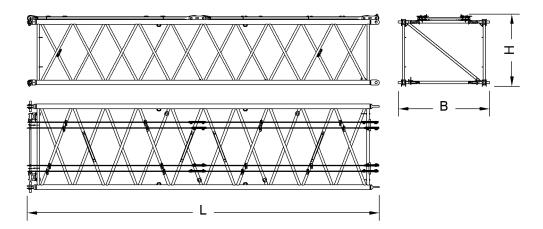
2821 boom section dimensions 40 ft for LR1300SX/LR1300SXW
